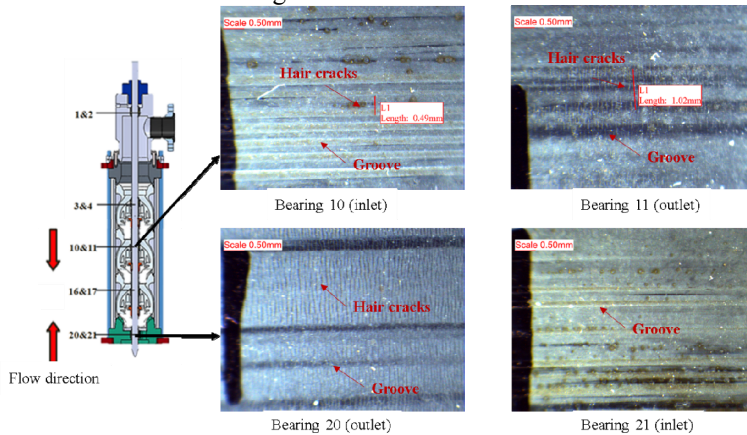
Microscopic examination of the bearing (journal) surface for the inlet and center bearings at 117 hours.
